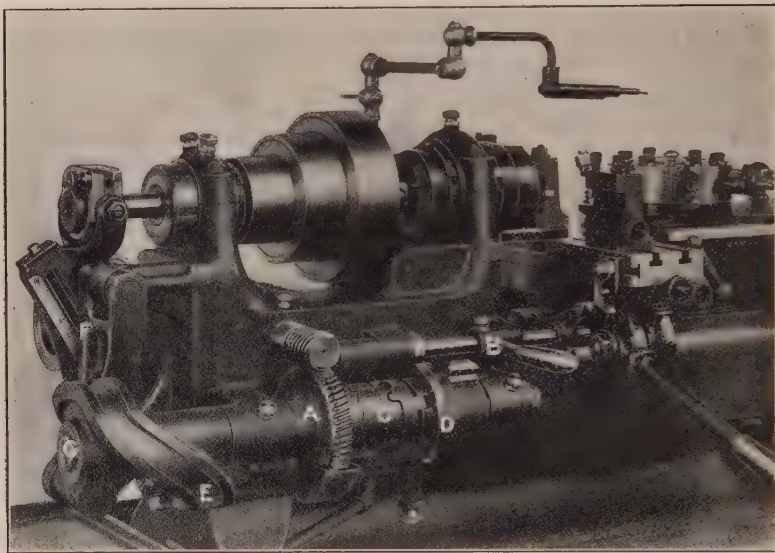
The Brown & Sharpe Hand Screw Machine with Automatic Wire Feed; a simple example of the 'Lay Shaft' Mechanism.
